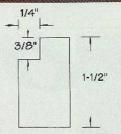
End view of pieces A and B. Cut a rabbet on the inside upper corner of each piece.
